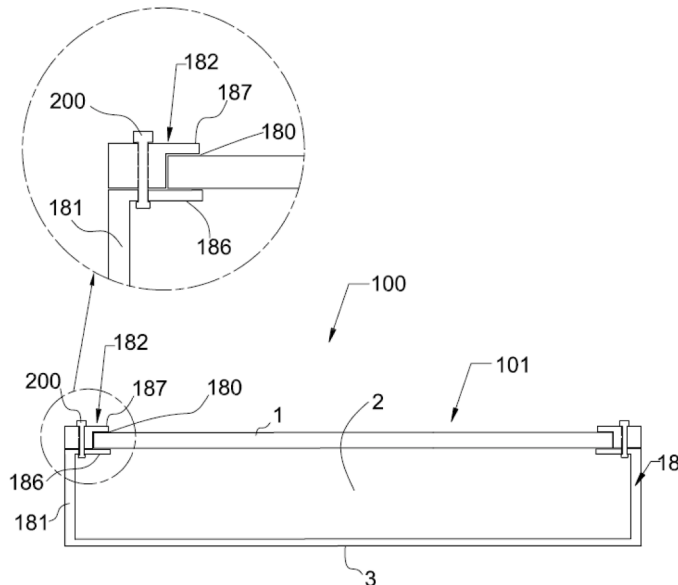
An embodiment of the cooling system in which the solar panel assembly can be detached from the water chamber.
